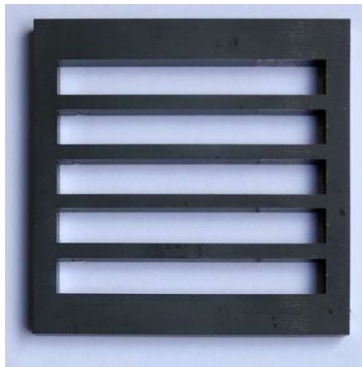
Mold made from stainless steel used for casting to manufacture the samples
